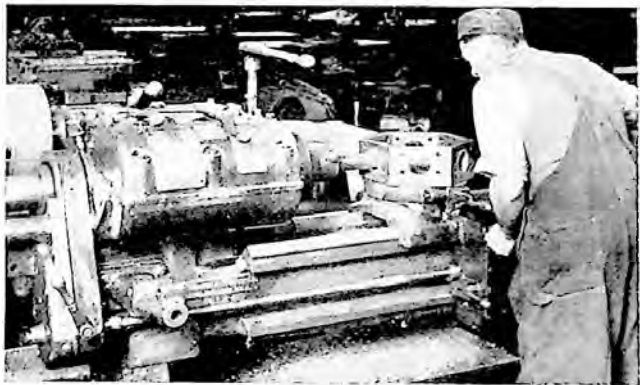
Reboring Turret Holes on Reconditioned Machine
